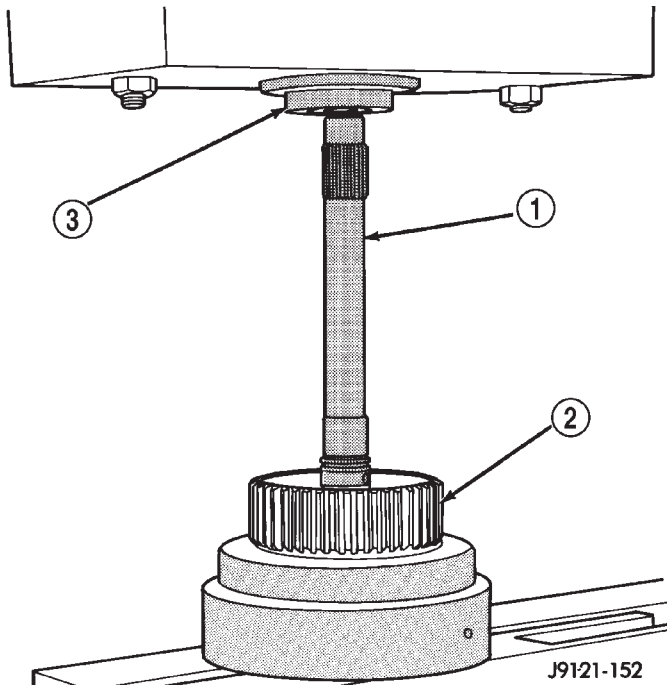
Pressing Input Shaft Into Rear Clutch Retainer
